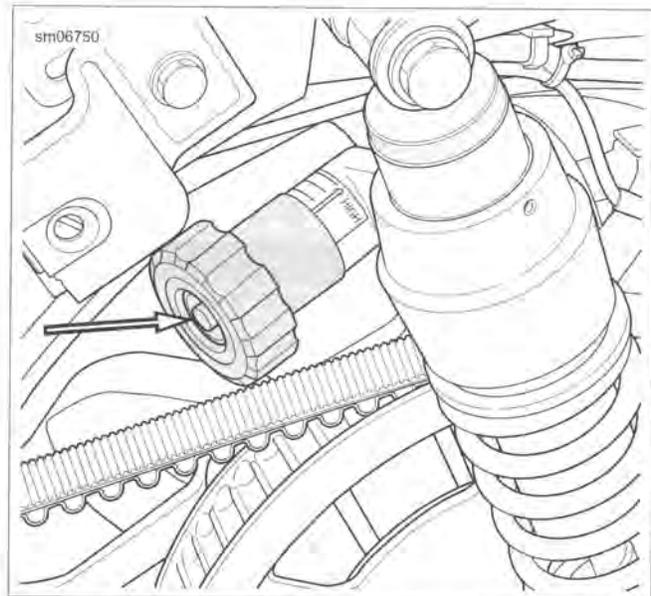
Rear Shock Absorber Preload Adjuster Knob
